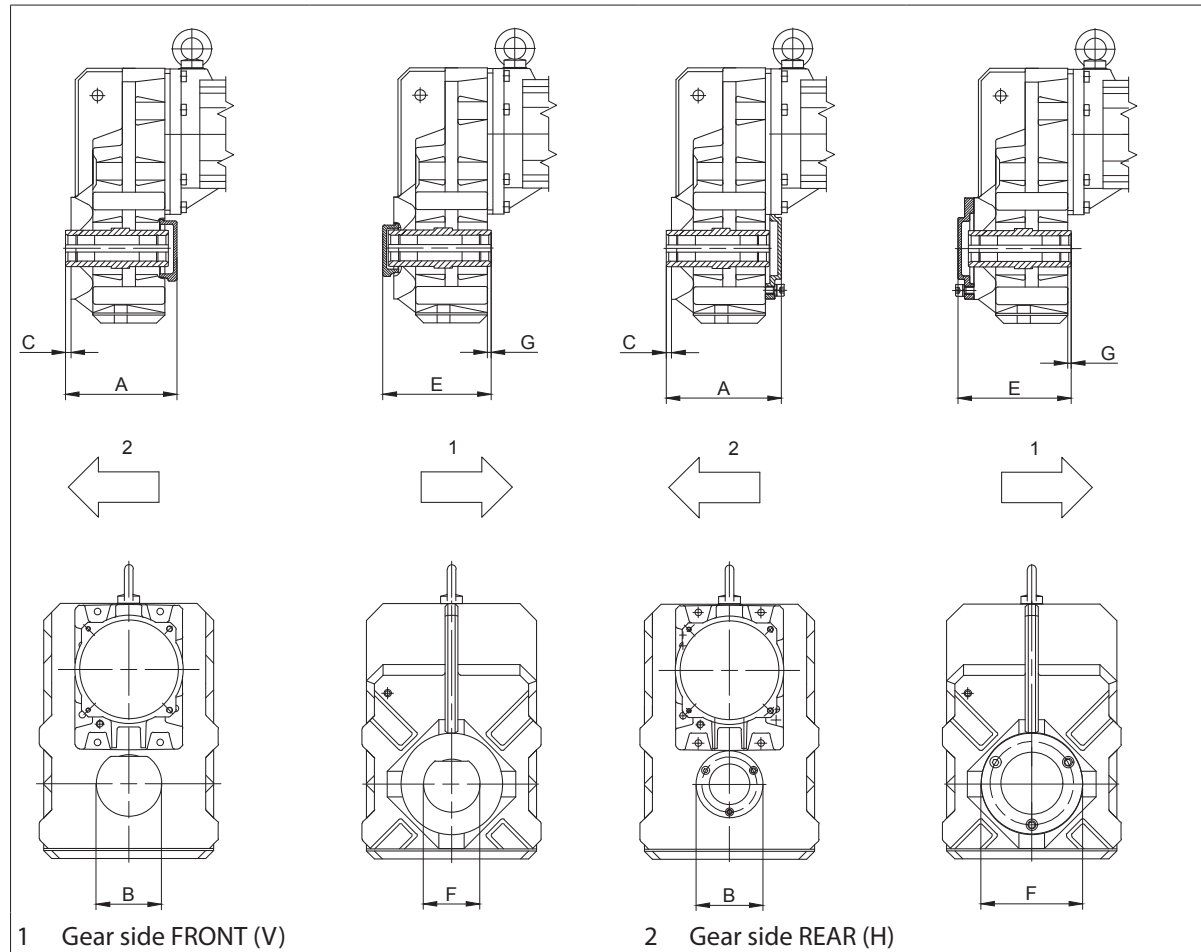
SSV cover for shaft-mounted gearbox BF10 ... BF90
